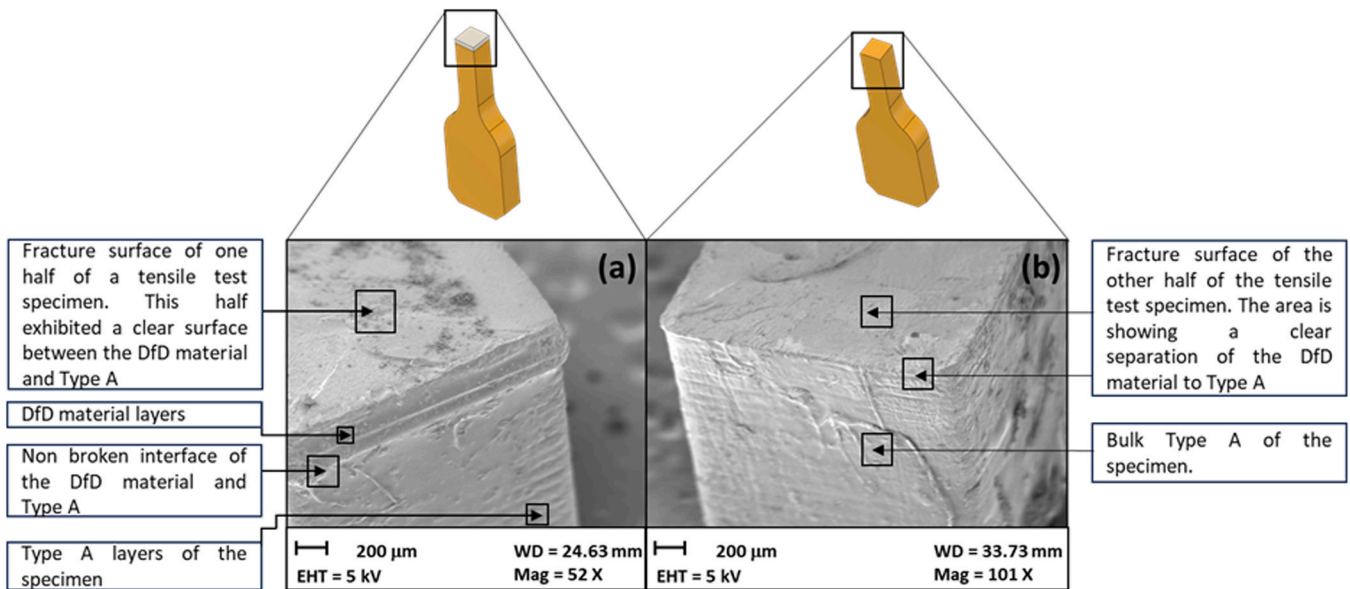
Fracture surfaces of both parts of a tensile test specimen in ZXY direction. The DfD material sticks to one part of the specimen (a), while the separation happens between the DfD material and Type A. At the other part (b) no DfD material is visible.
